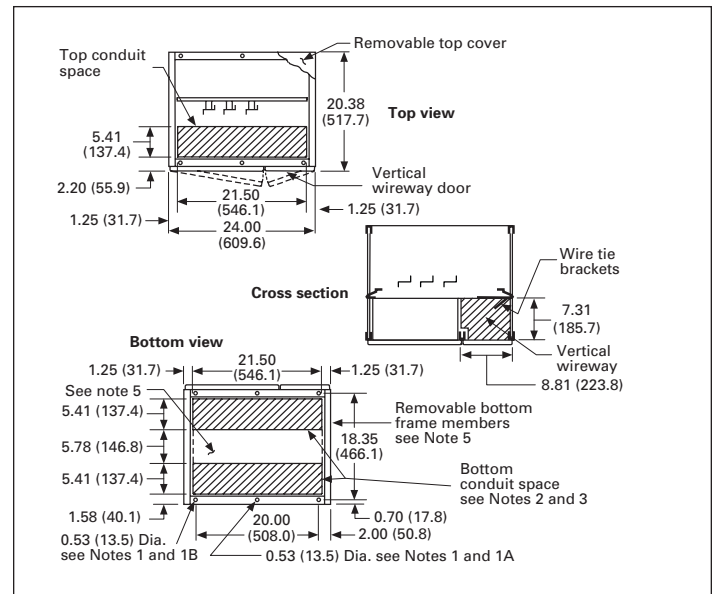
24 inches wide, 21 inches deep, front mounted only (4710A34)
